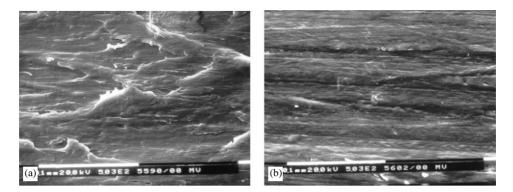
Machined surface morphology of HDPE at the cutting speeds of: (a) 1 mm/min; and (b) 20,000 mm/min.
